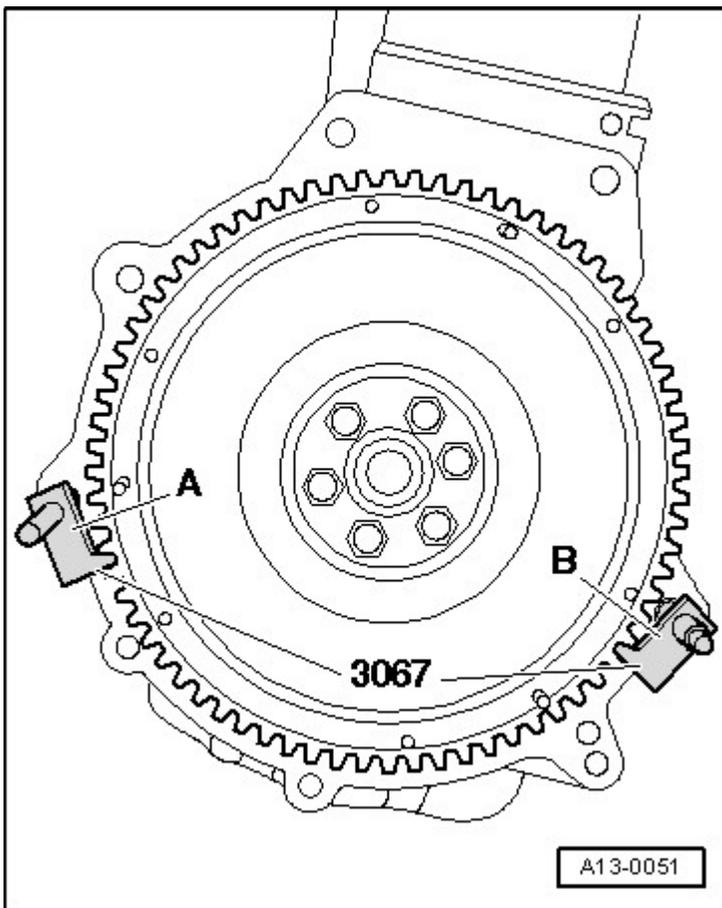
Identifying Retainer -3067- Inserted In Hole On Cylinder Block
